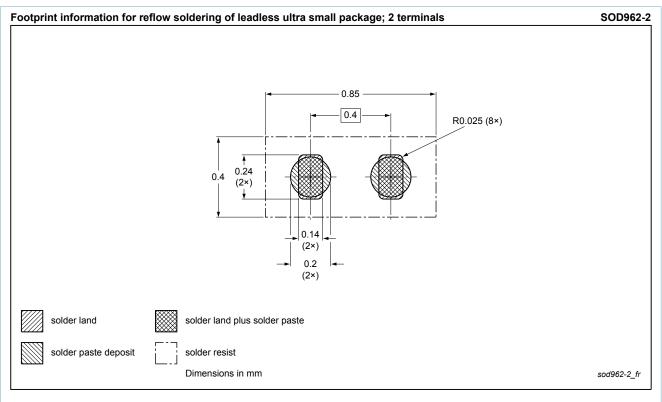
Reflow soldering footprint for DSN0603-2 (SOD962-2)
